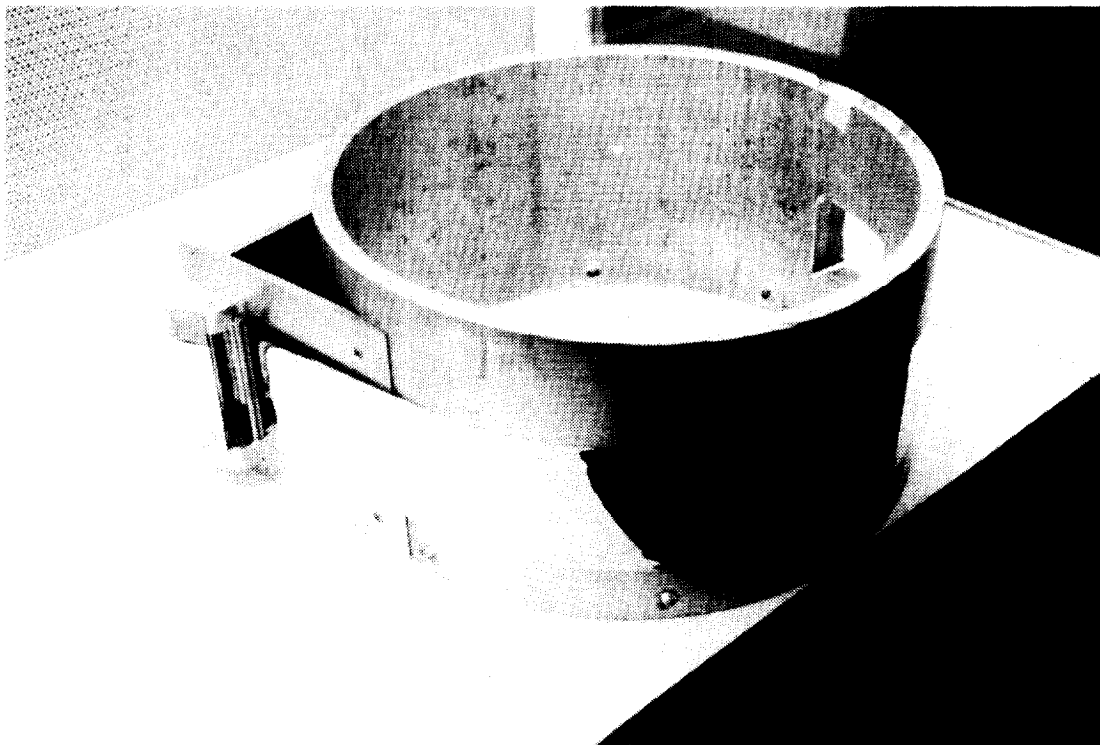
Flight design of cover and stowing mechanism mounted on test fixture.
